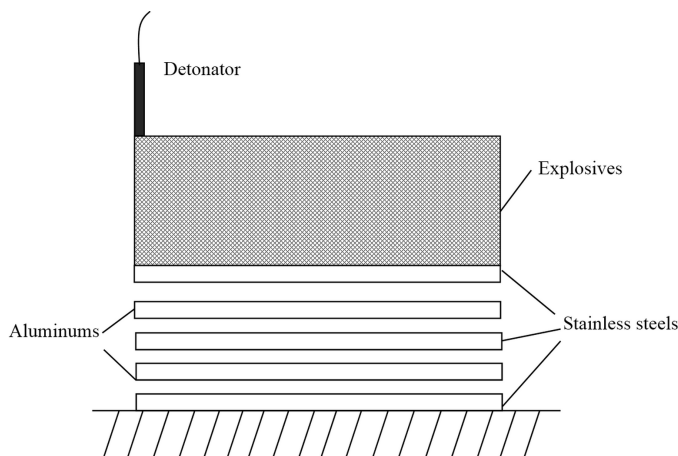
Schematic diagram of explosive welding experimental device
